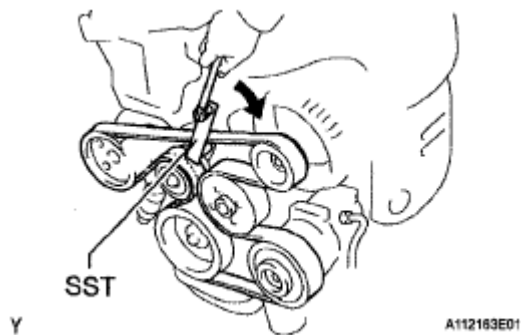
Locating V-Ribbed Belt Tensioner Arm
